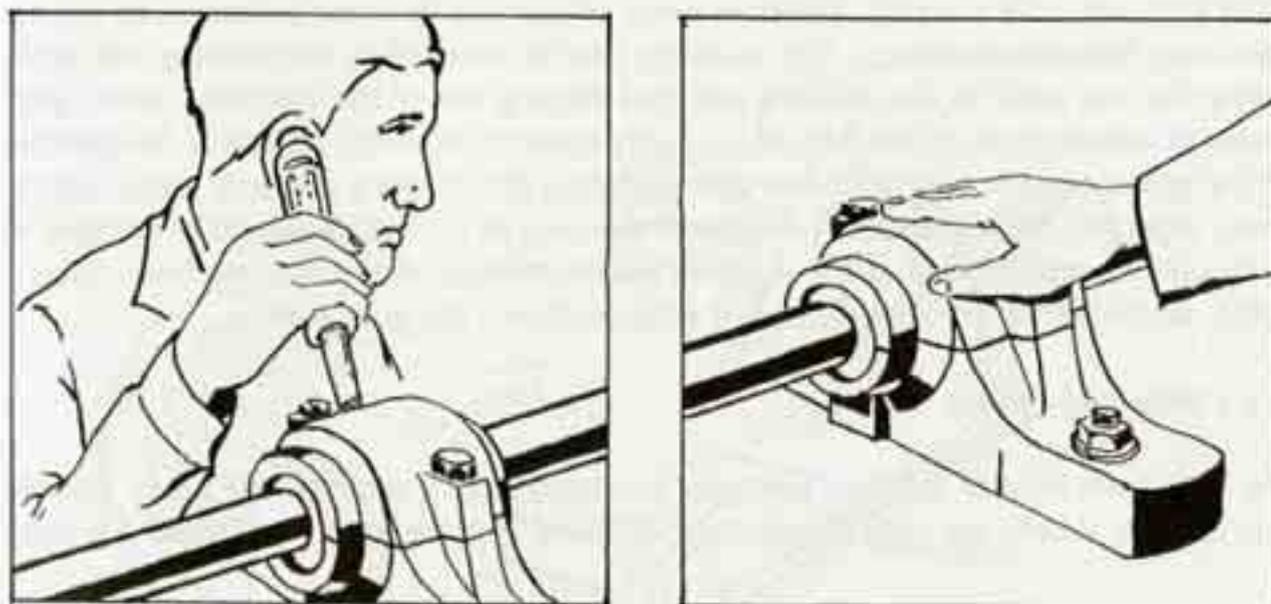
Simple Techniques for Sensing Bearing Noise and Condition
